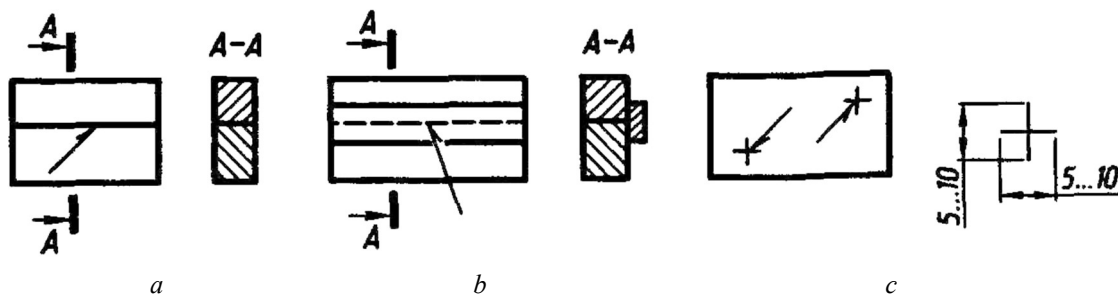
Conditional representation of welds of welded joints:
